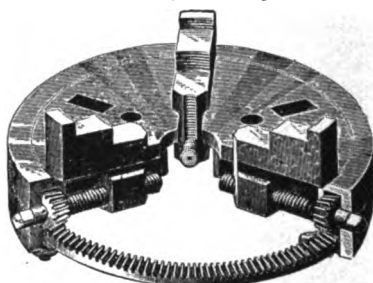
FRONT SECTIONAL VIEW OF CHUCK. Showing the rack, pinion screws and jaws, also large hold through the centre, and slots through face for confining extra heavy work.
